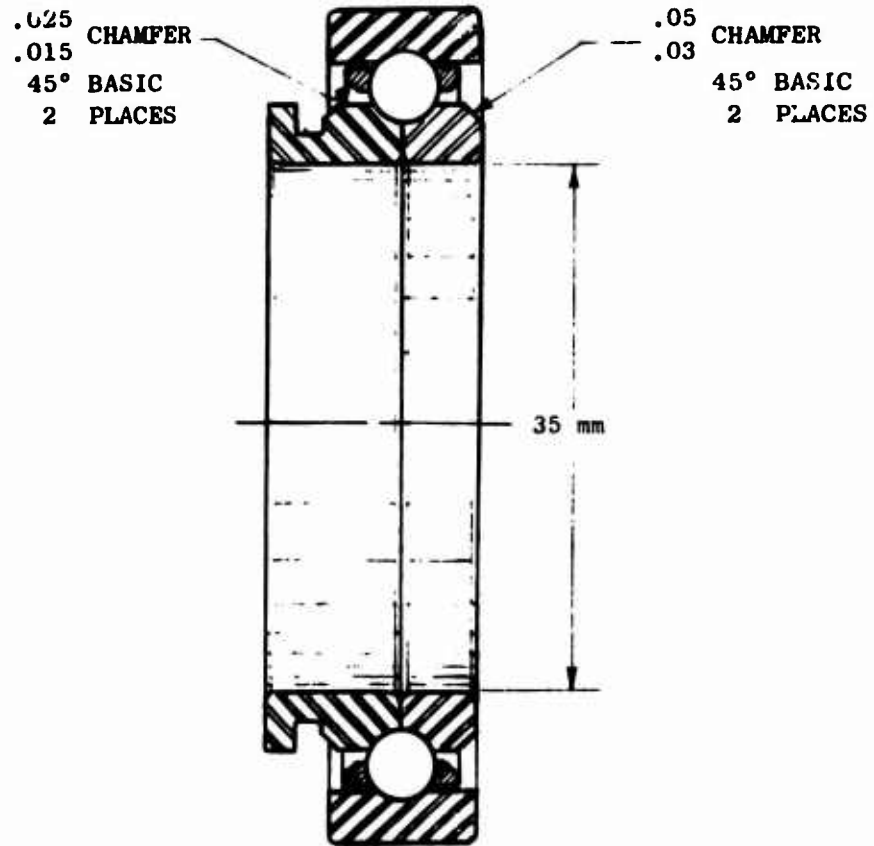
Test Bearing With Modified Cage and Races To Improve Lubricant Penetration
